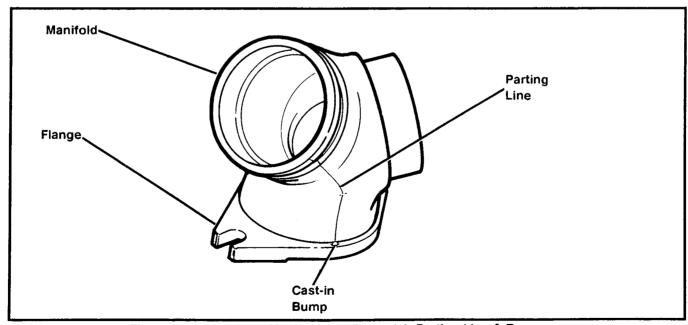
Alignment - Manifold and Flange(s); Parting Line & Bump.
